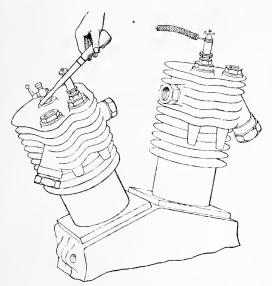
The Screwdriver Method of Testing a Sparking Plug. (See text, page 59.)
